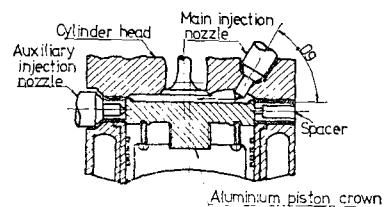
Shape of combustion chamber of test engine and location of nozzles in it
